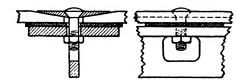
In thicker sections, where the edge of the sheet is beveled, a doublewedged top metal strip can be used, leaving the outer surface smooth. Base channel to which sheet is bolted is an extruded Tsection with cutouts in the web for the bolt and nut.
